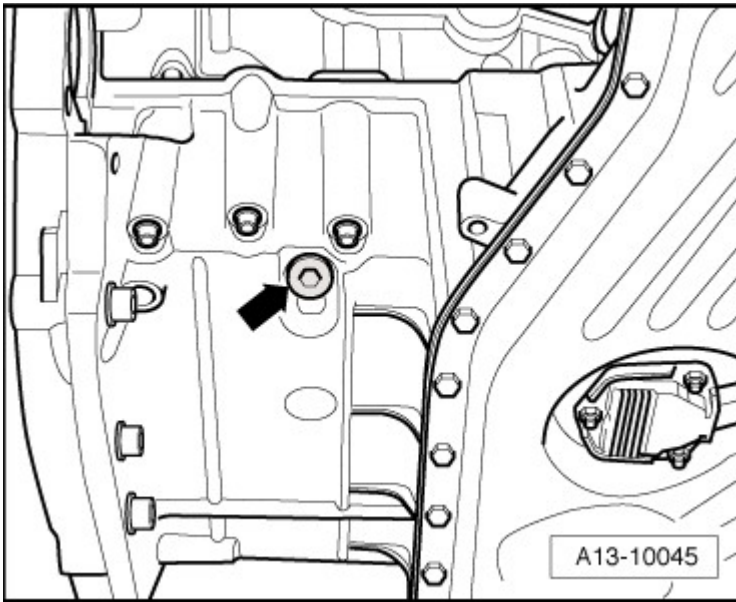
Identifying Locking Bolt Of Upper Part Of Oil Pan
